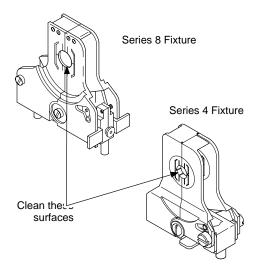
Cleaning the Micro Weld Head Fixtures
